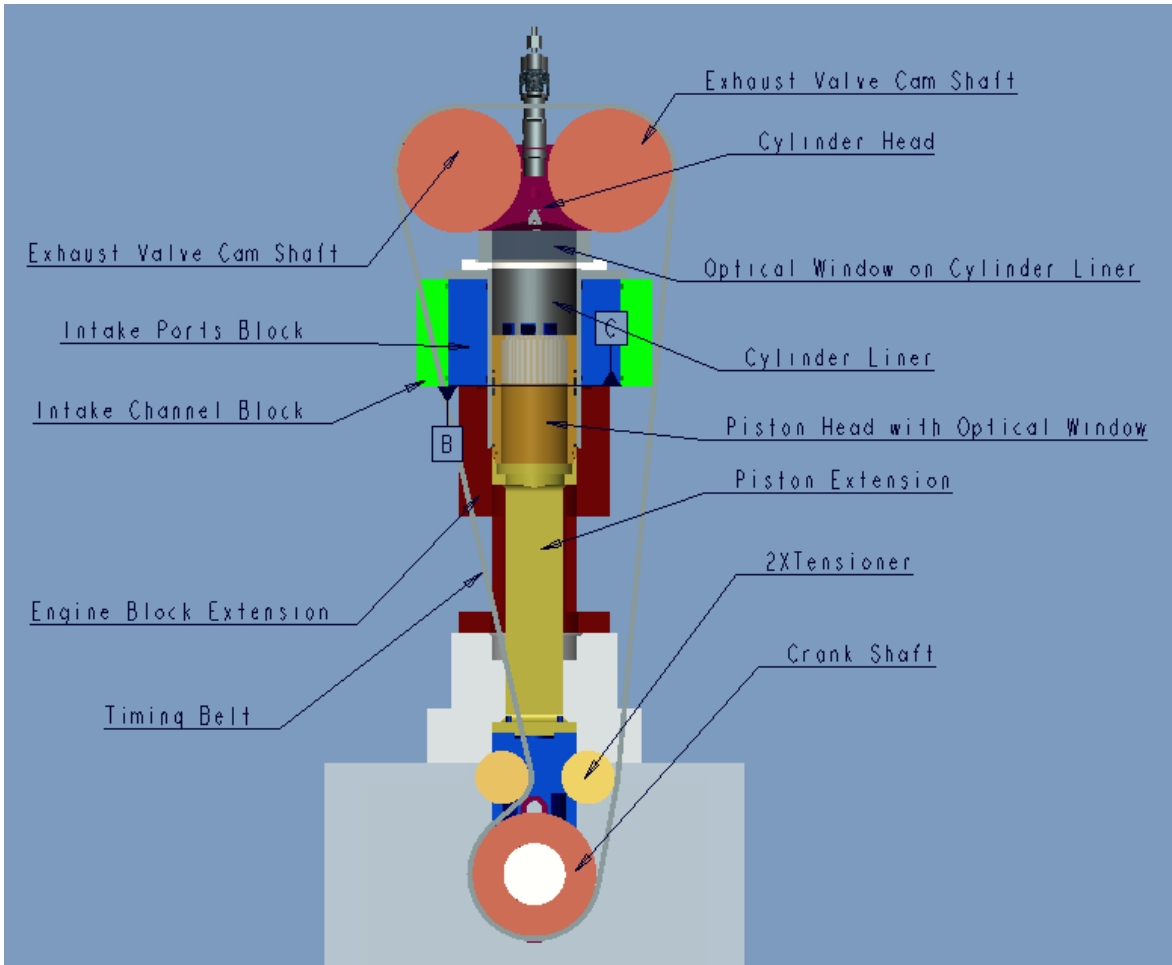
Uniflow 2-Stroke Single Cylinder Engine assembly layout
